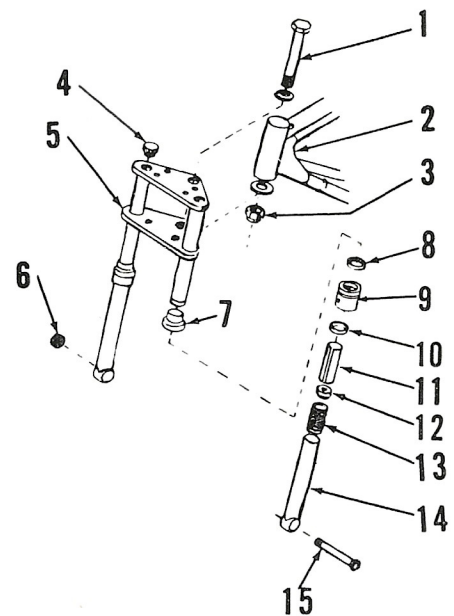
Exploded view of Widow Maker front suspension unit.
